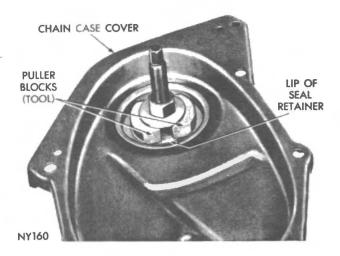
Puller blocks expended to puller position (Tool CA-3506).
